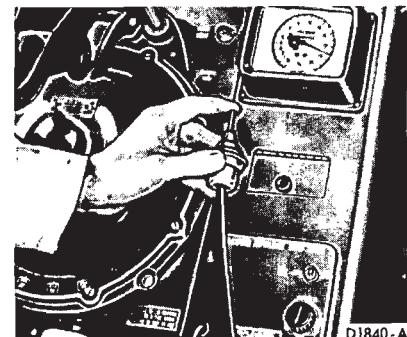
Testing Transmission Vacuum Unit for Leakage
